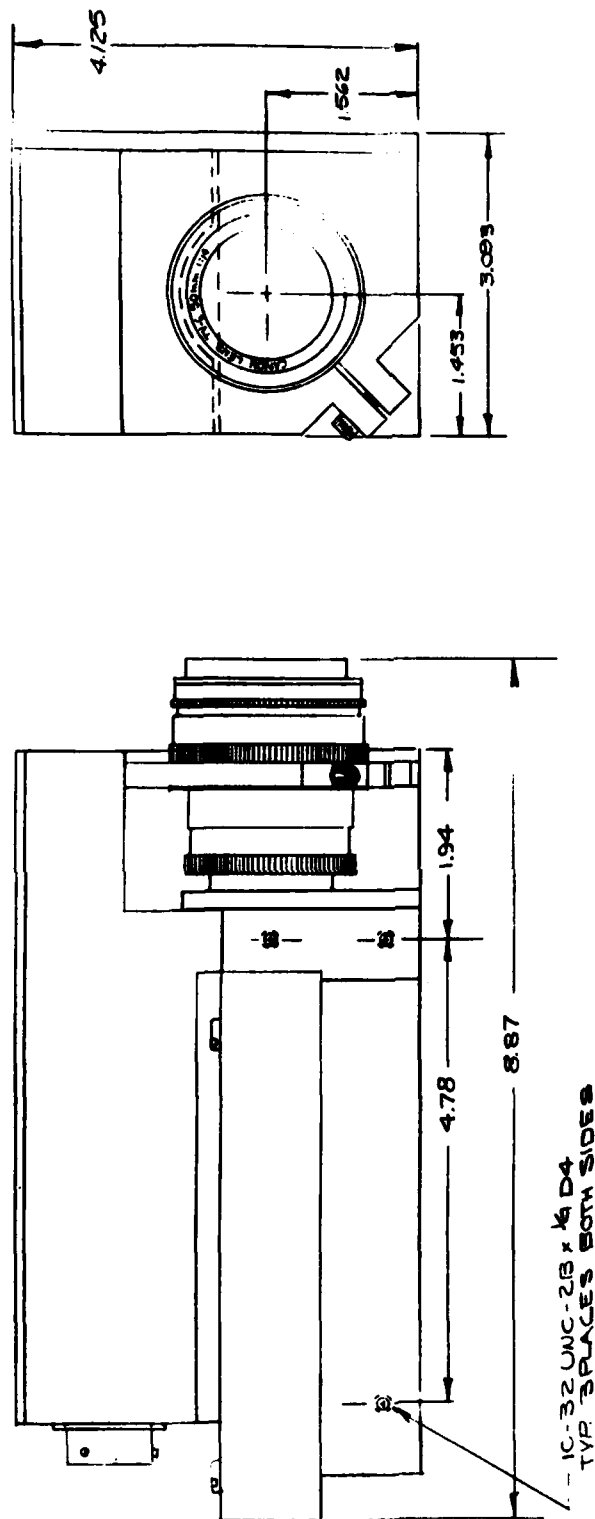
Outline drawing of the instrument assembly. Its weight with the film magazine and 65' of film is 2.7 kg.
